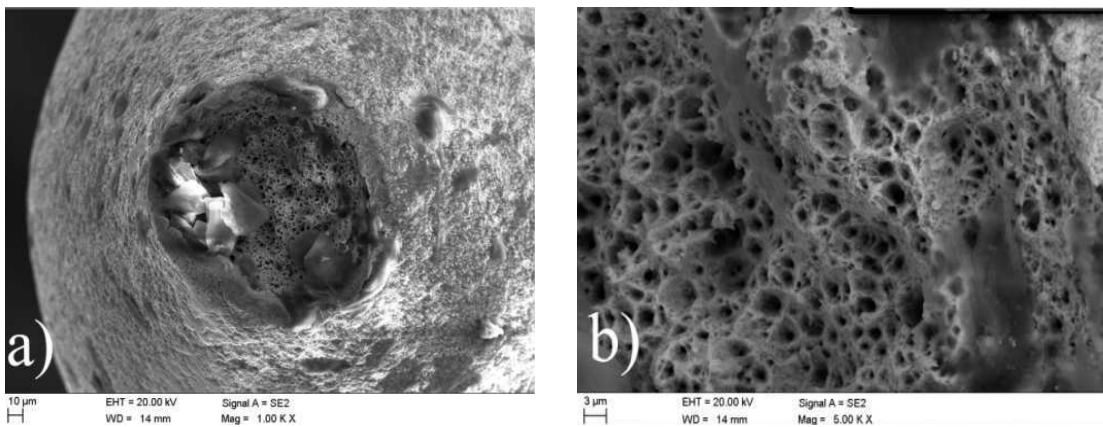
Fracture of the Zn sample after strength test, 609006, a) break in the areas of large elongation, b) ductile fracture, craters on the break surface
